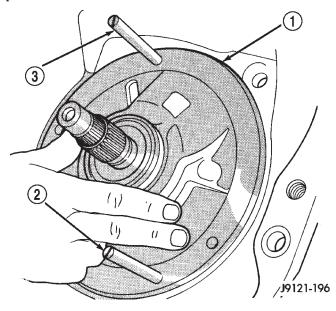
Installing Oil Pump Assembly In Case 1 - OIL PUMP - PILOT STUD TOOL
